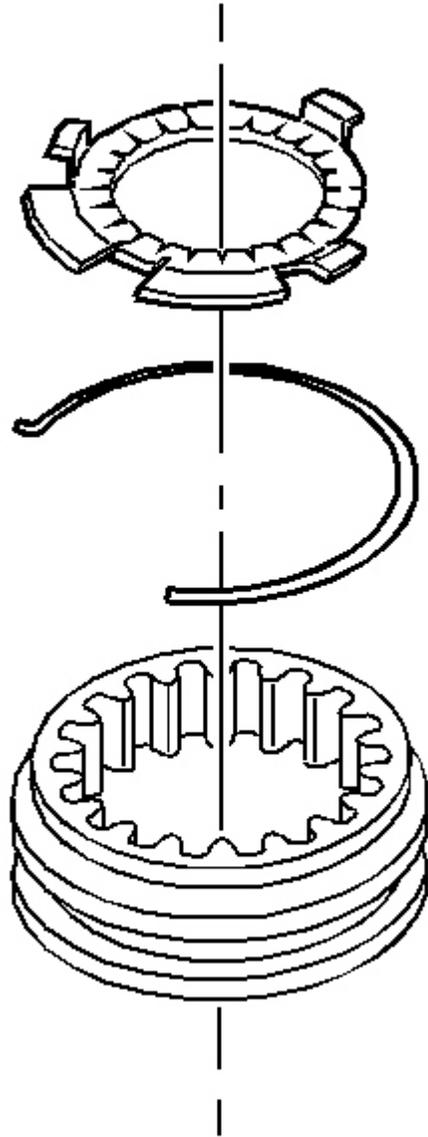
Identifying Synchronizer Key Retainer & Spring
